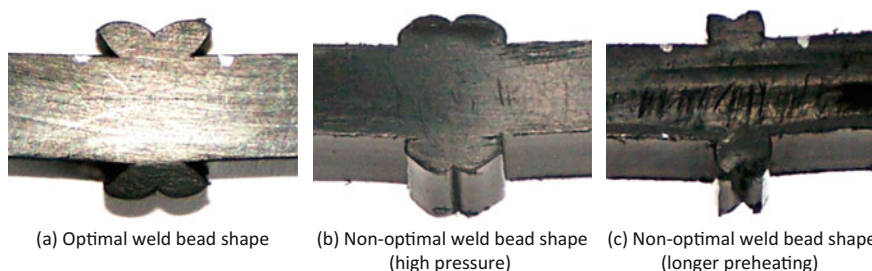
Weld bead shapes in a pipe wall
